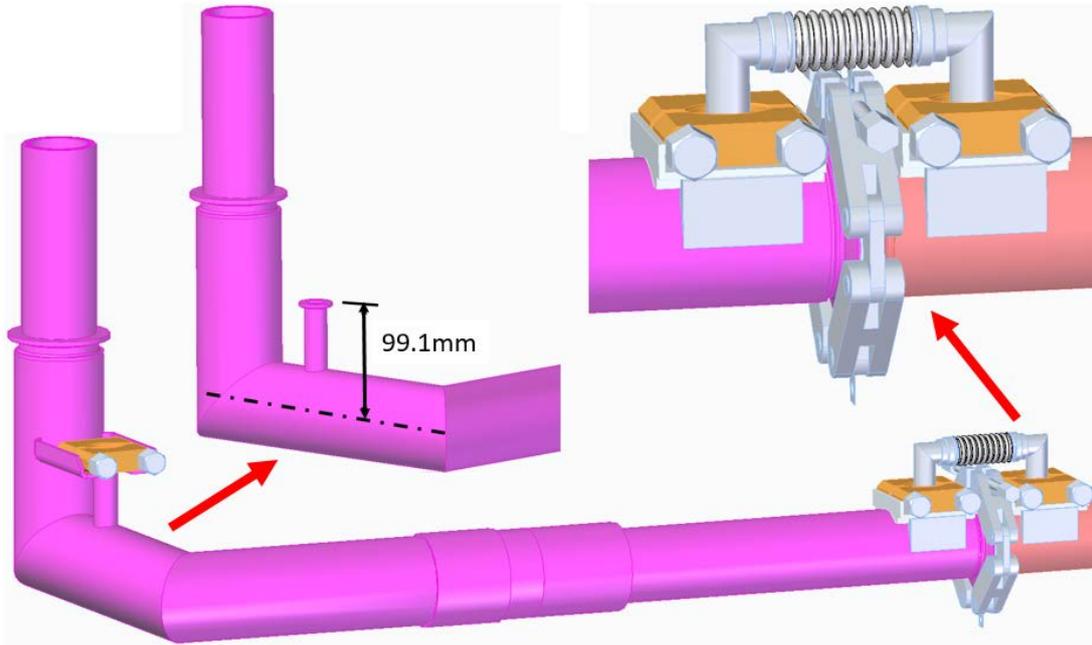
Vacuum clamps located in high radiation environment, which will be fitted during final installation by STFC
